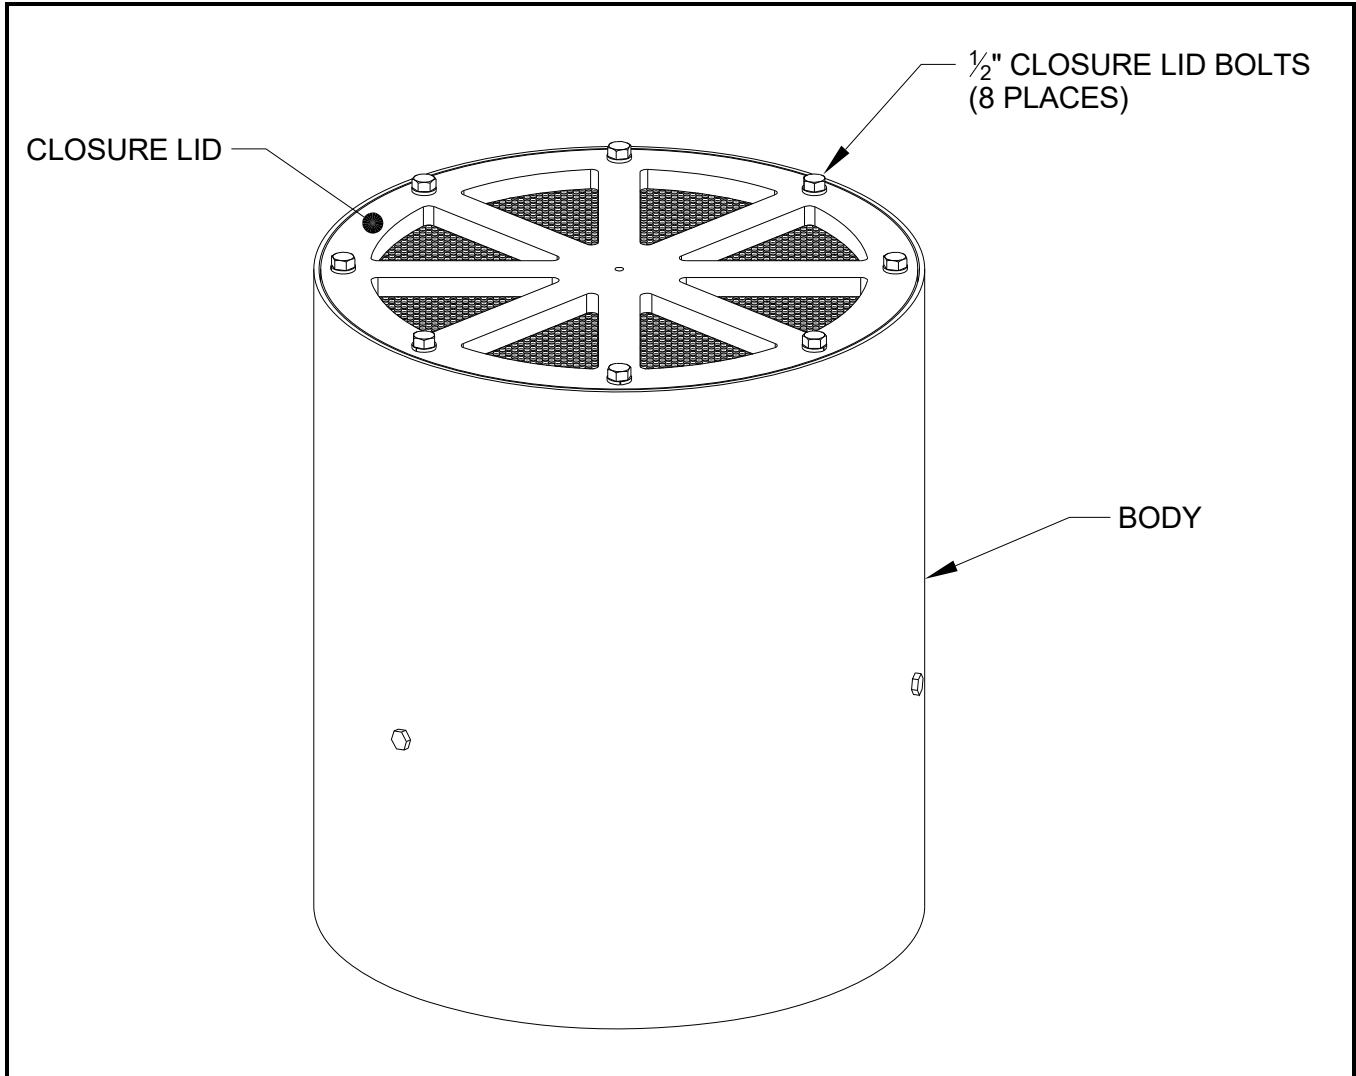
INC Outer Package, Raw Material Shipping Container – Overall View
